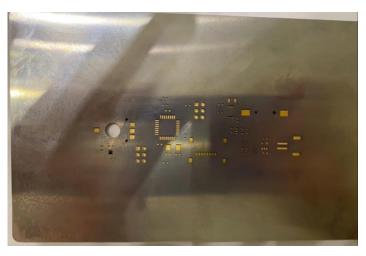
OSH Stencil overlaid on the circuit board, revealing the gold pads that require solder paste
